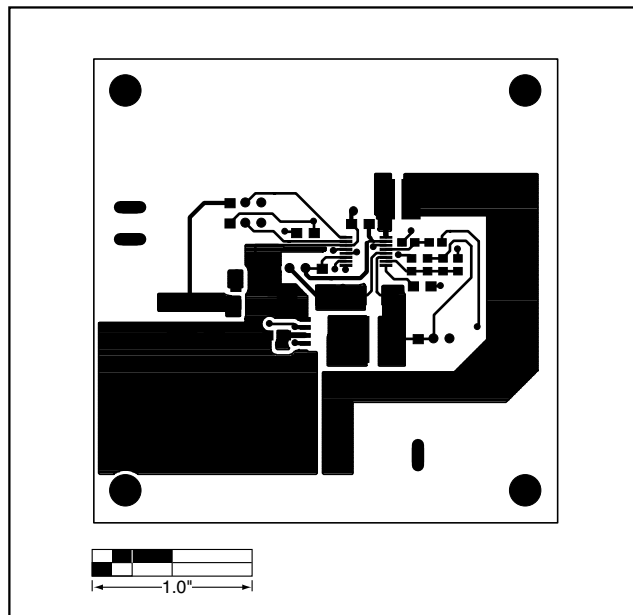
MAX1775 EV Kit PC Board Layout—Component Side
